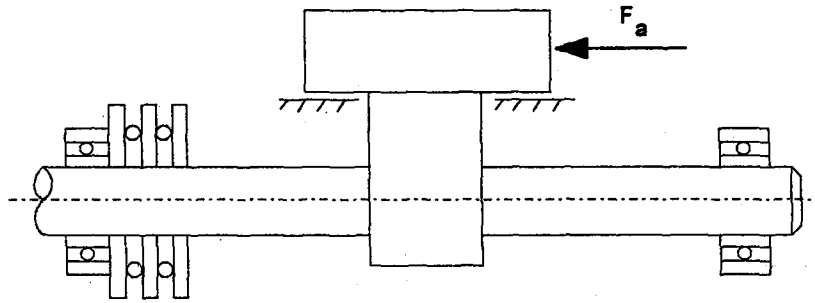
Schematic view of feed drive assemblies with thrust and ball bearing arrangement
